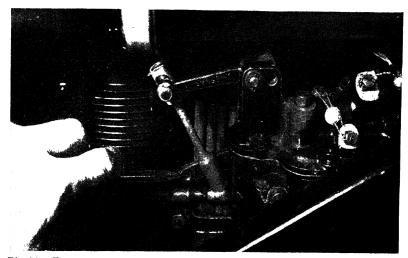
The carburetter mixture control lever indicating two holes for the alternative operation range of up to 15,000 ft. and over 15,000 ft.
